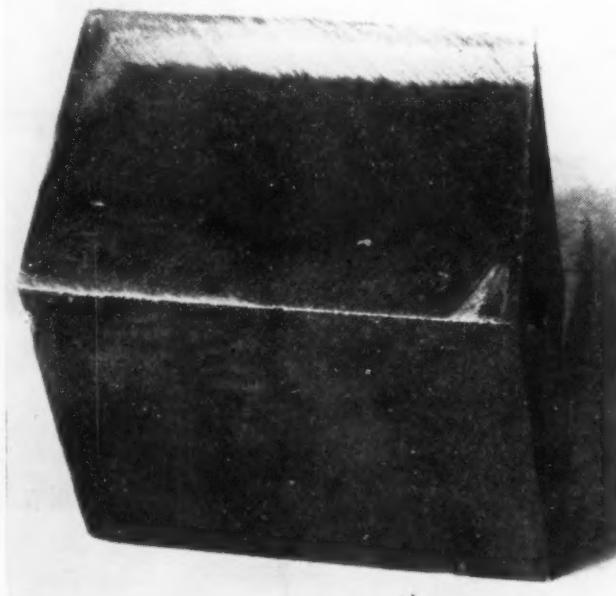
TEST SPECIMEN SHOWING CHIP BAND
